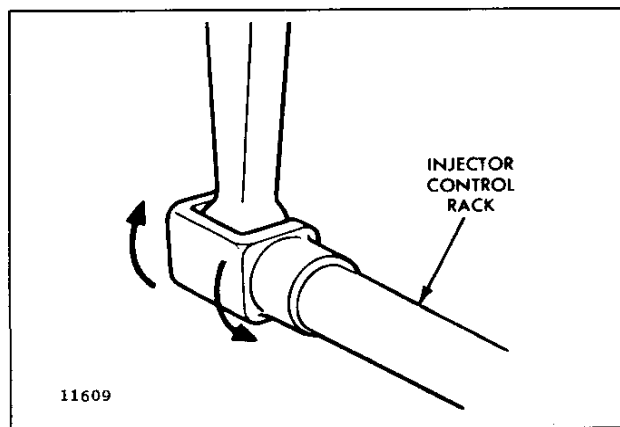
Checking Rotating Movement of Injector Control Rack
